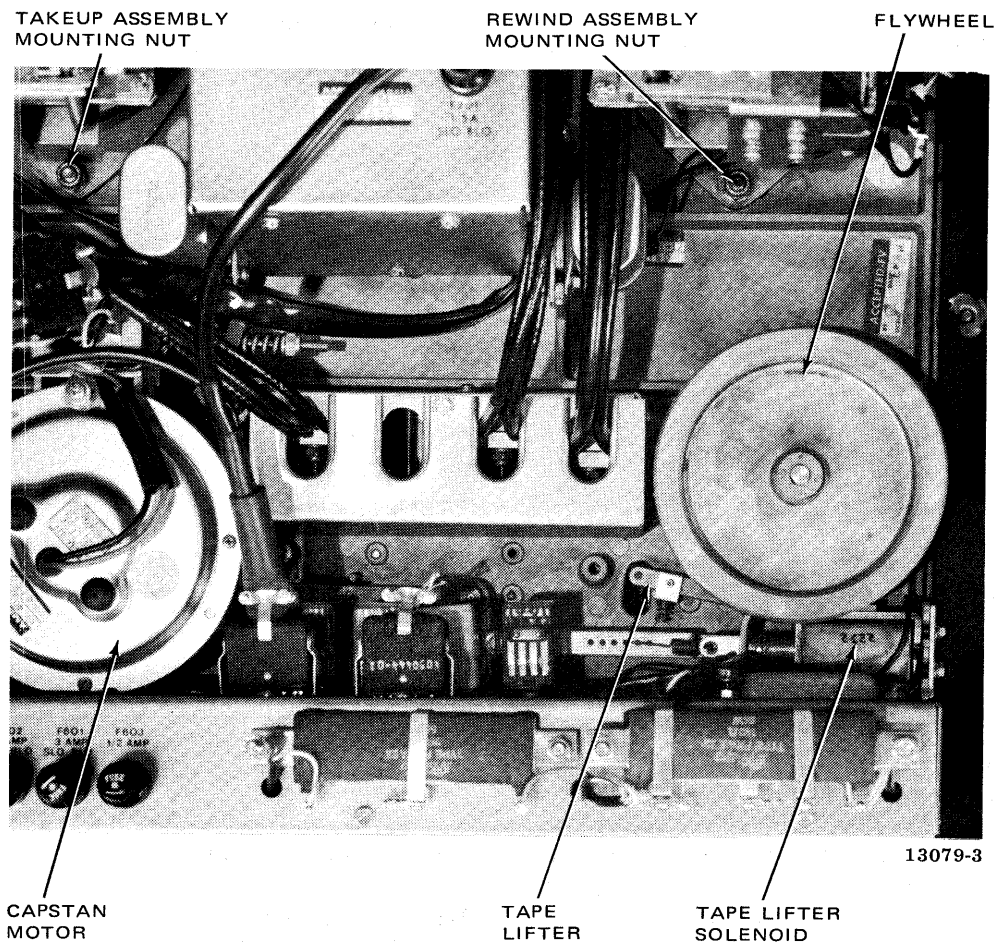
Takeup and Rewind Assembly Mounting Nuts
